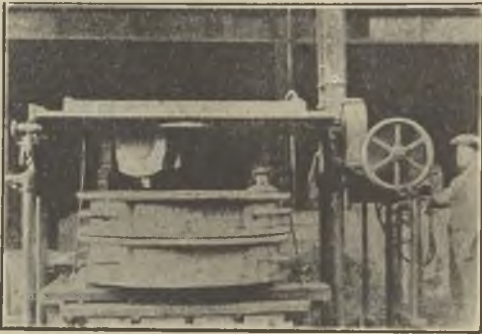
MAKING AXLE BOXES. STRIPPING THE PATTERN.
